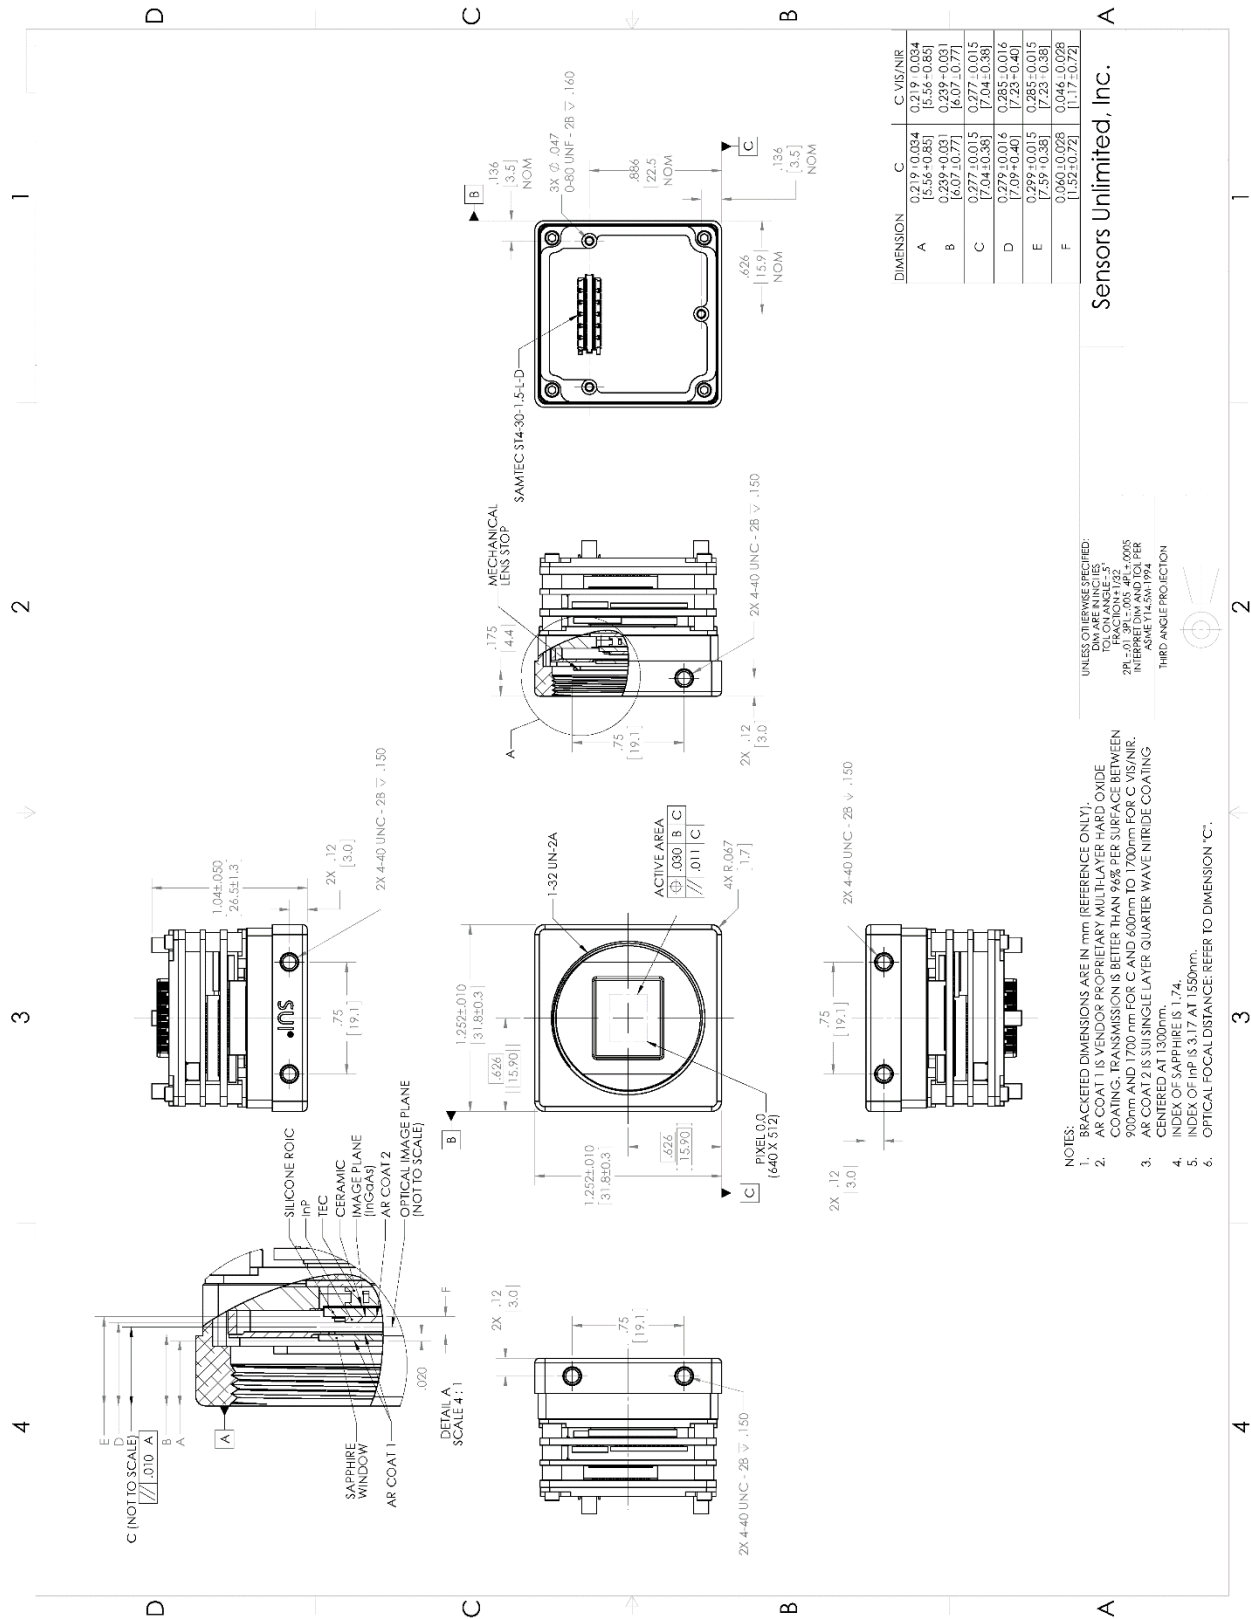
Mechanical drawing of OEM CSX with optional ST4 board-to-board connector
